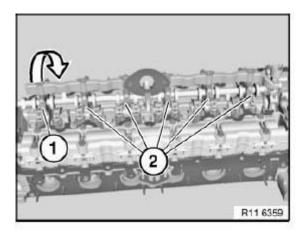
Releasing Screws On Bearing Cap Number Courtesy of BMW OF NORTH AMERICA, INC.
